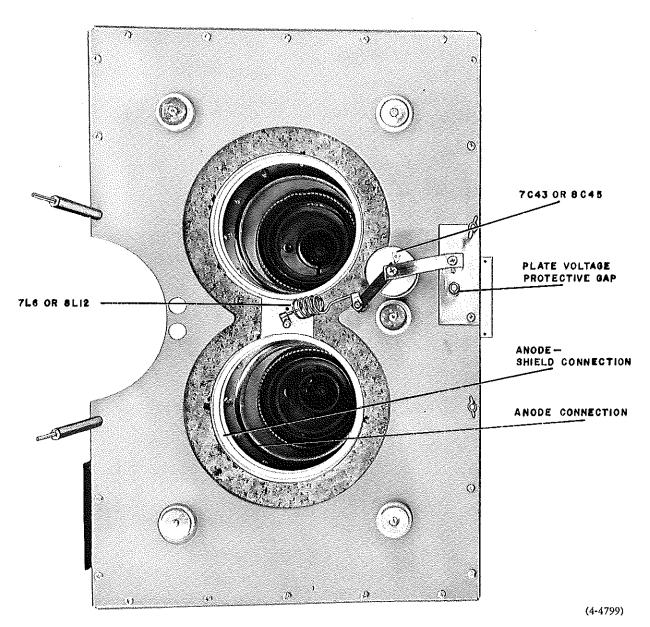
Cavity in Process of Construction: Anode Contact Assembly and Shield in Place, Tubes Lacking, Bottom View
